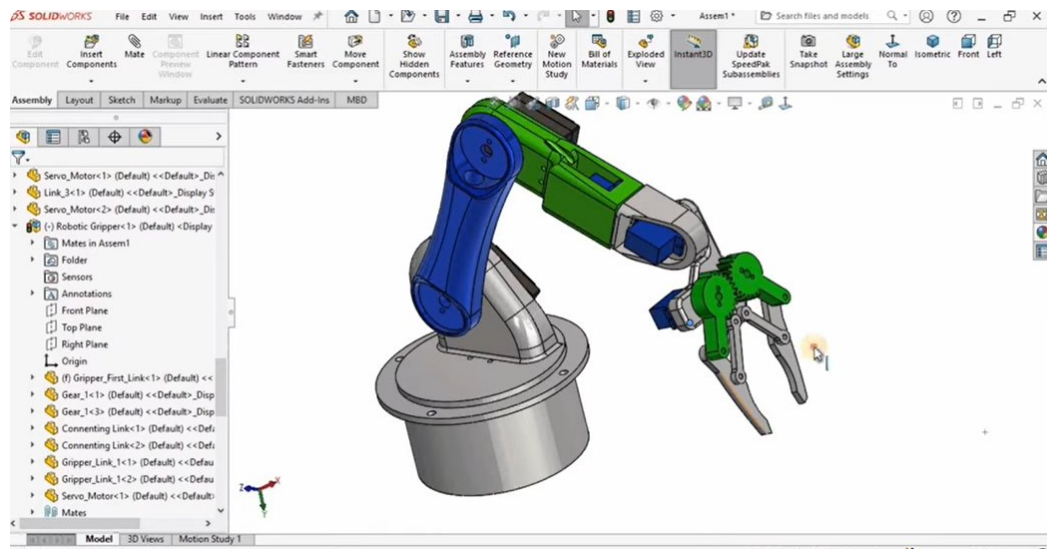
Full Assembly — Complete 6-DOF Robotic Arm in SolidWorks 2022
